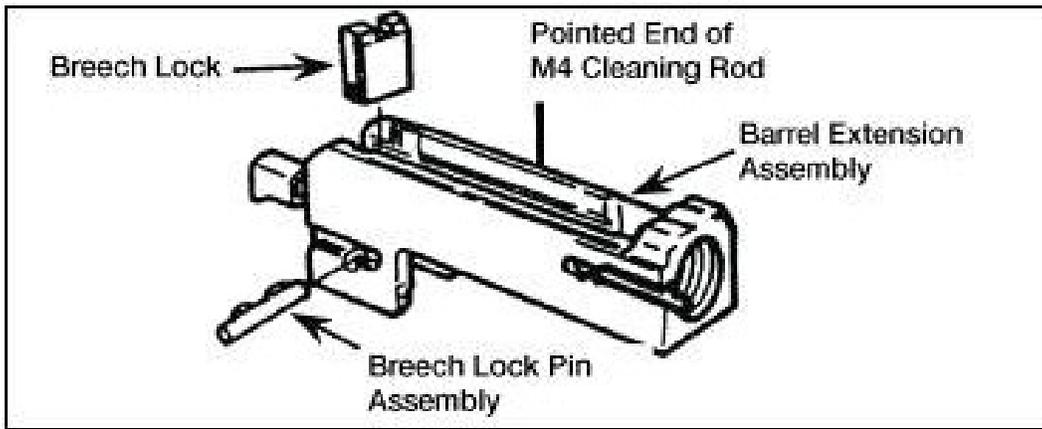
ST-1025_19 (Removal of the breech lock pin assembly and breech lock)
